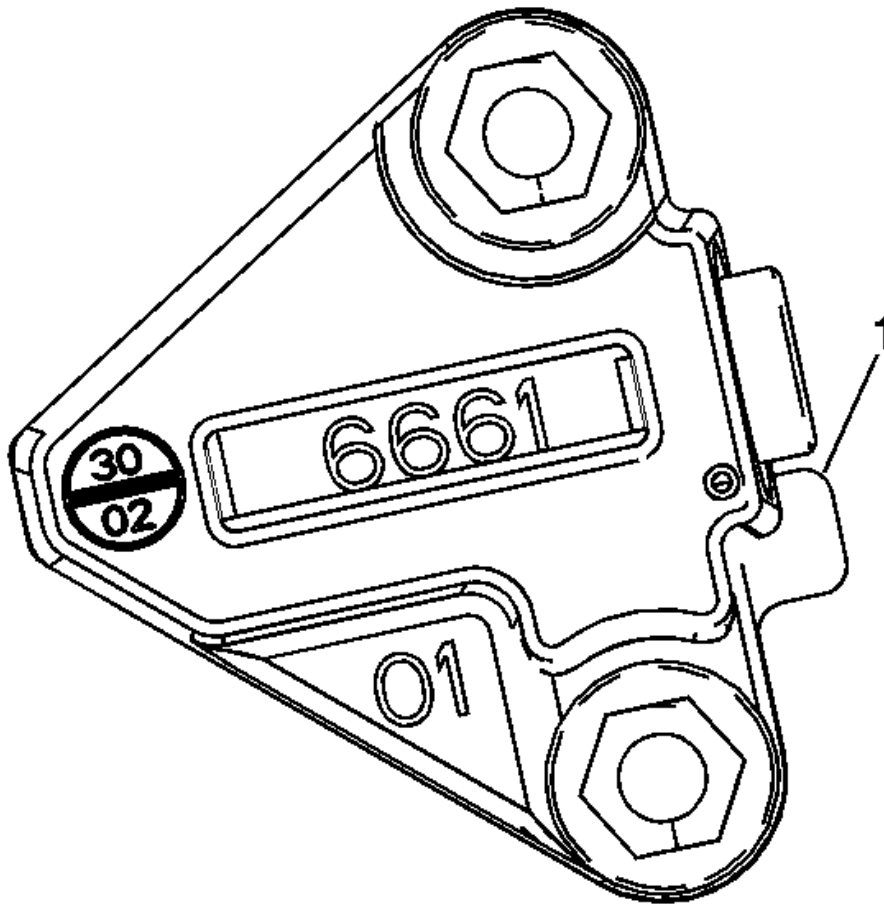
Identifying Left Secondary Camshaft Drive Chain Tensioner Gasket
